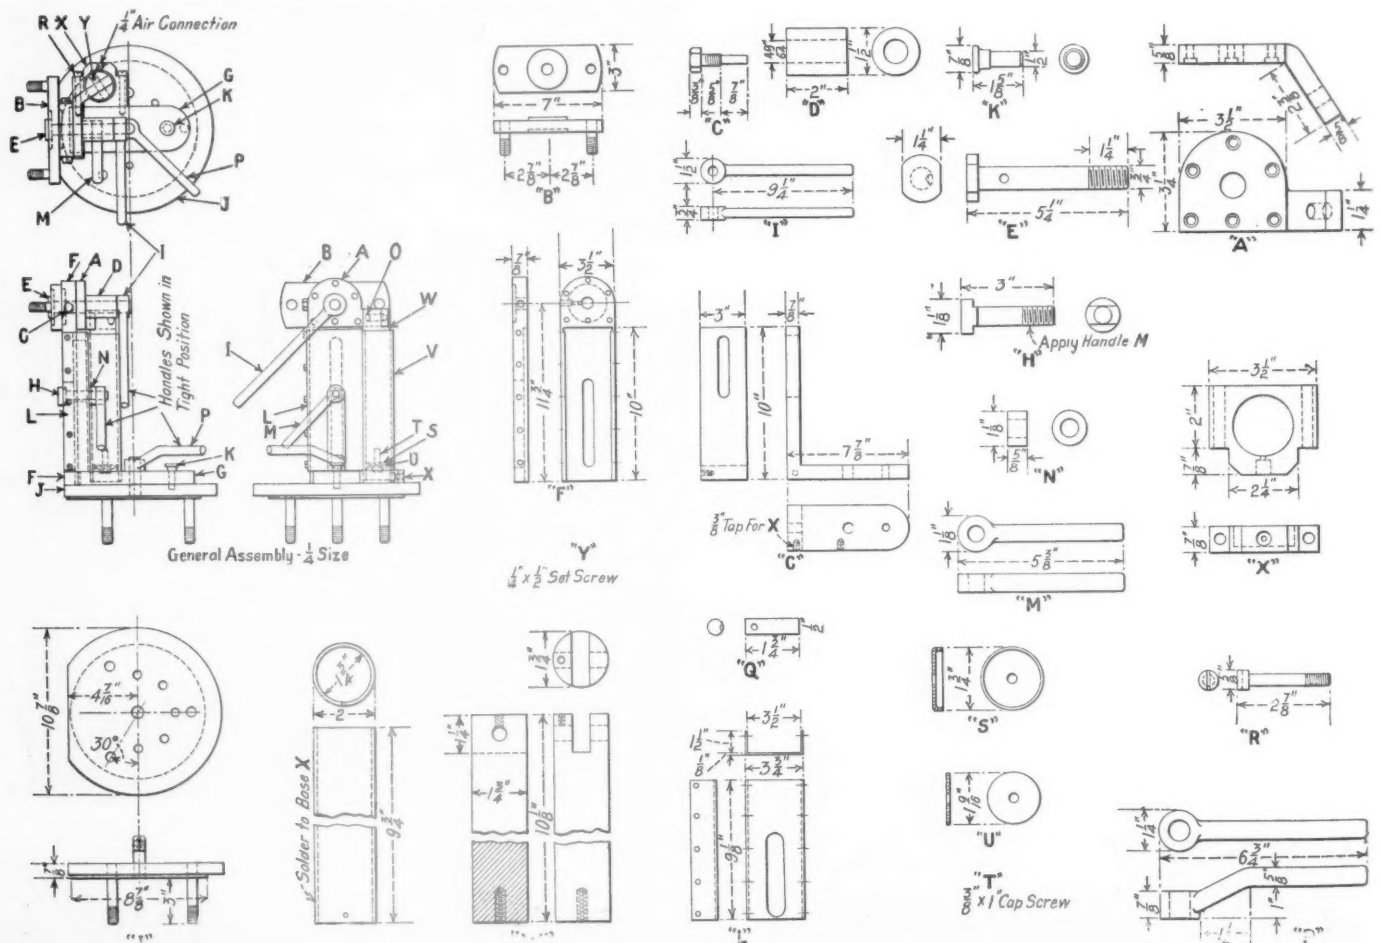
Fixture for holding distributing valves in any position when making repairs
